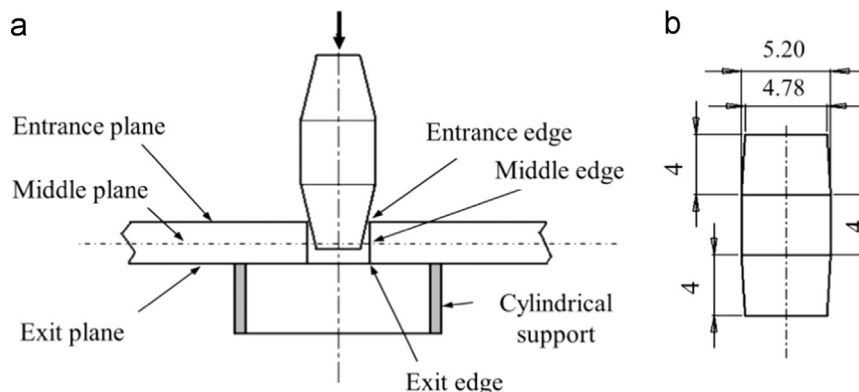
(a) Schematic of the hole cold expansion process, (b) dimensions of the pin (mm) [28].
